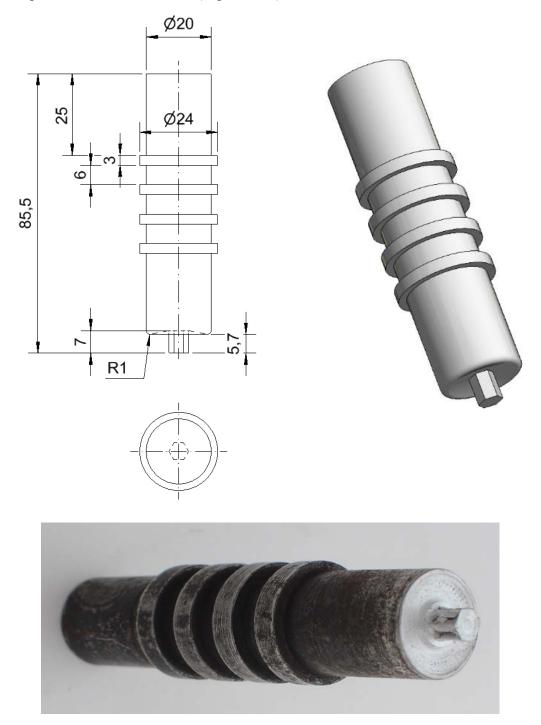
Tool geometry used for the friction stir welding of AA 6101 T6 alloy Hexagonal pin profile with concave shoulder (C1)
